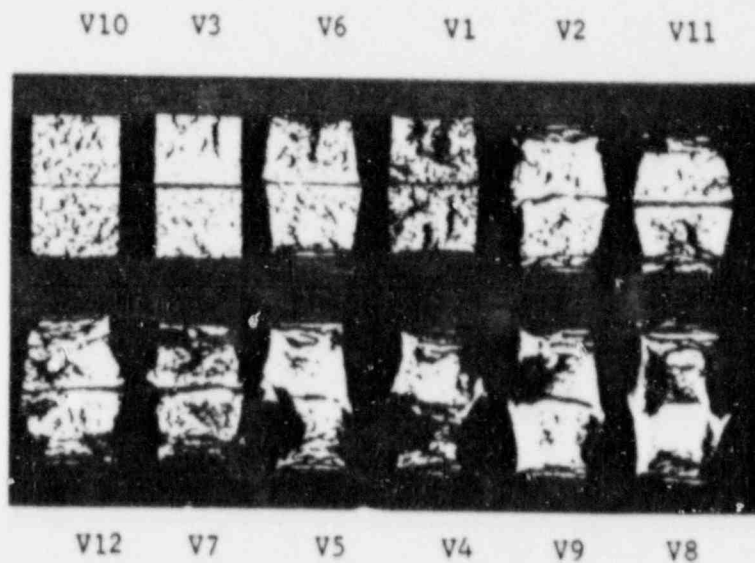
CHARPY IMPACT SPECIMEN FRACTURE SURFACES FOR
